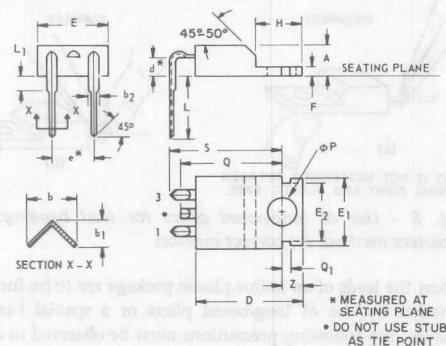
Dimensional outline of the JEDEC TO-220AB in-line-lead Versawatt transistor package.
